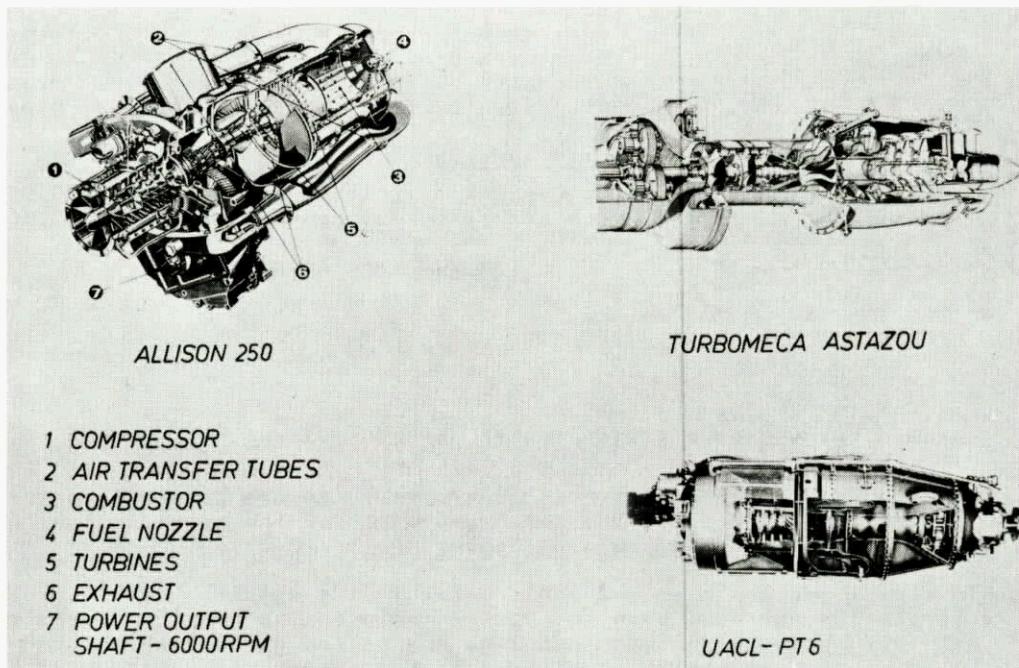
Turbo Engines with Combined Axial-Radial Compressor
